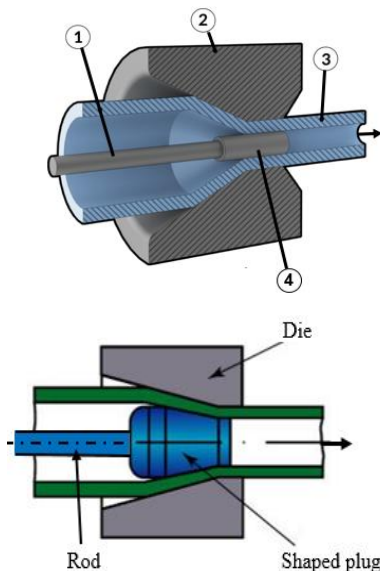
Principle of tube drawing with fixed cylindrical plug and shaped plug: 1 – rod, 2 – die, 3 – tube, 4 - cylindrical plug
